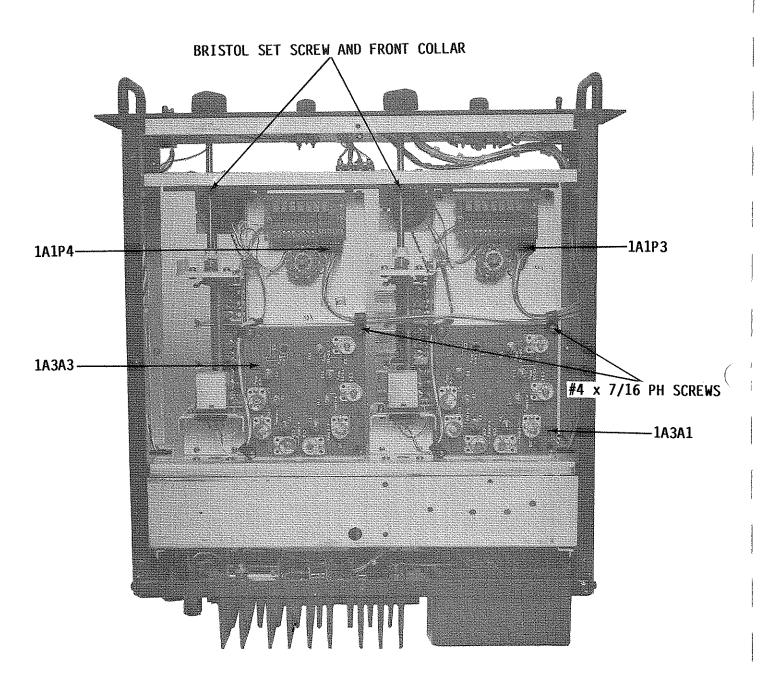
SHEET 2 of 19, BOTTOM COVER REMOVED
